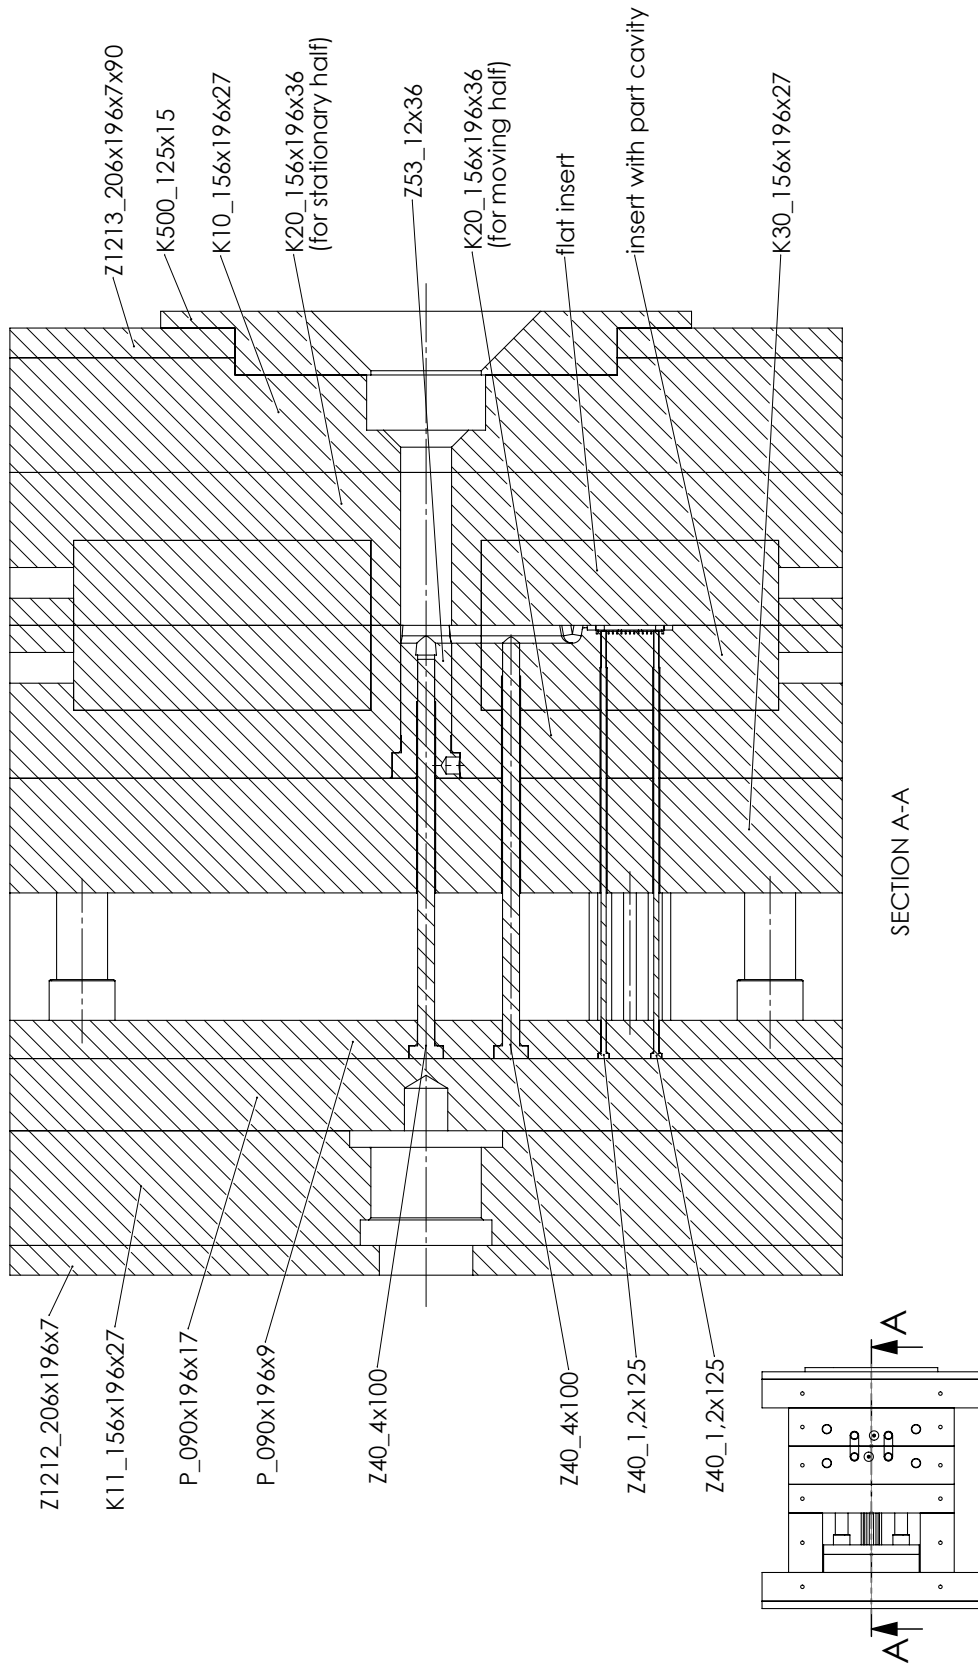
Cross-sectional view of the created prototype mold for the BOT of the microfluidic mixer. The two-plate mold consisted of Hasco standard parts and featured four interchangeable inserts for flexibility of the molded plastic parts enabling the 2k production of the BOT and TOP as well as other parts in the future.
